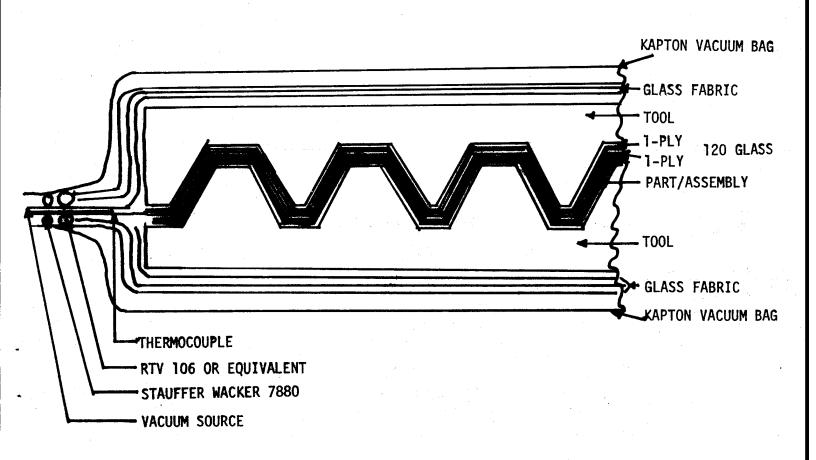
B VACUUM BAG SCHEMATIC CORRUGATED SECTION LAYUP- END VIEW
